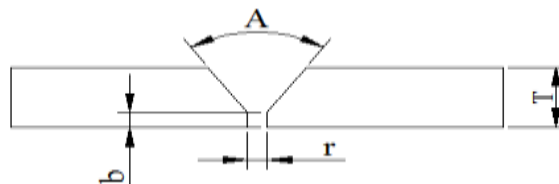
Geometry Dimensions as Per Standard of ASTM
